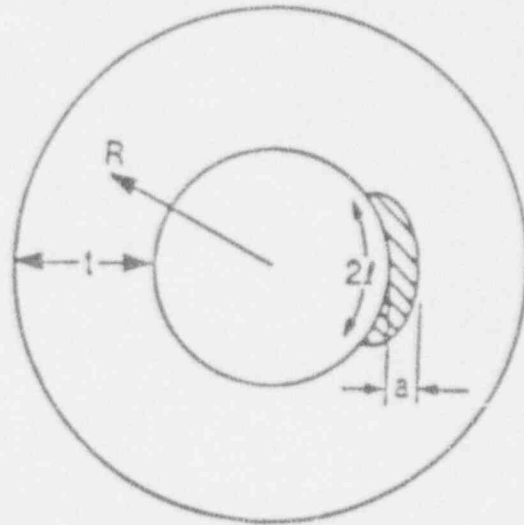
Schematic of a Part-Through, Circumferential Surface Flaw in a Cylinder - Constant Depth Flaw
